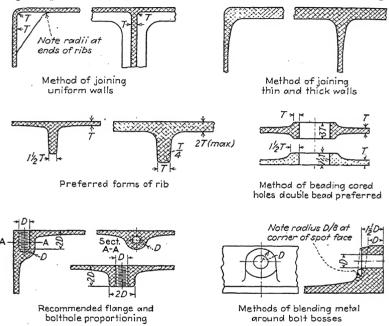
Aluminum Company of America recommendations on details of casting design.
